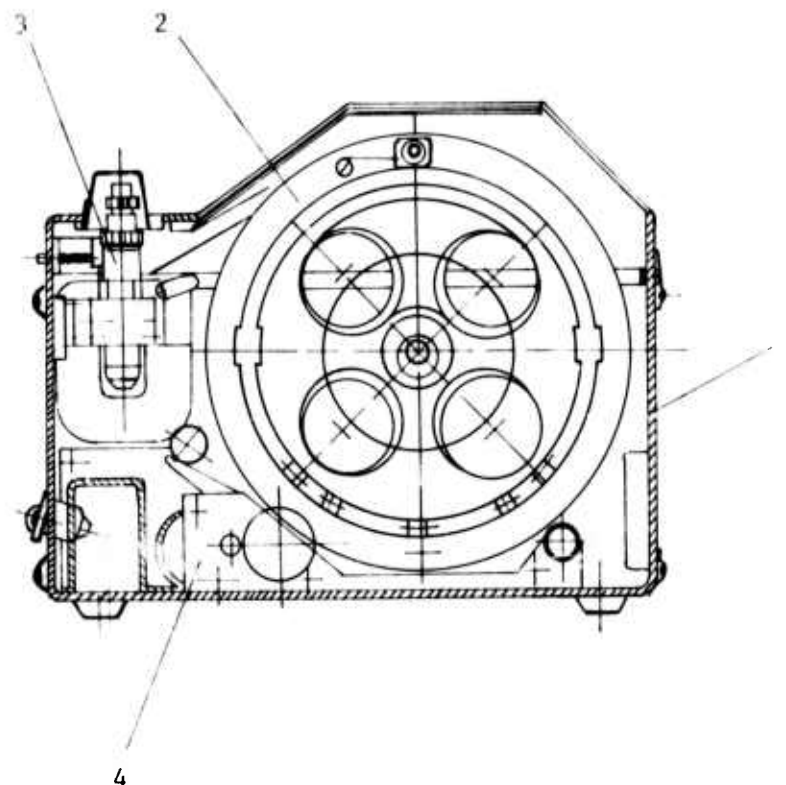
Schematic drawing of the PST hot-pen recorder [1]
